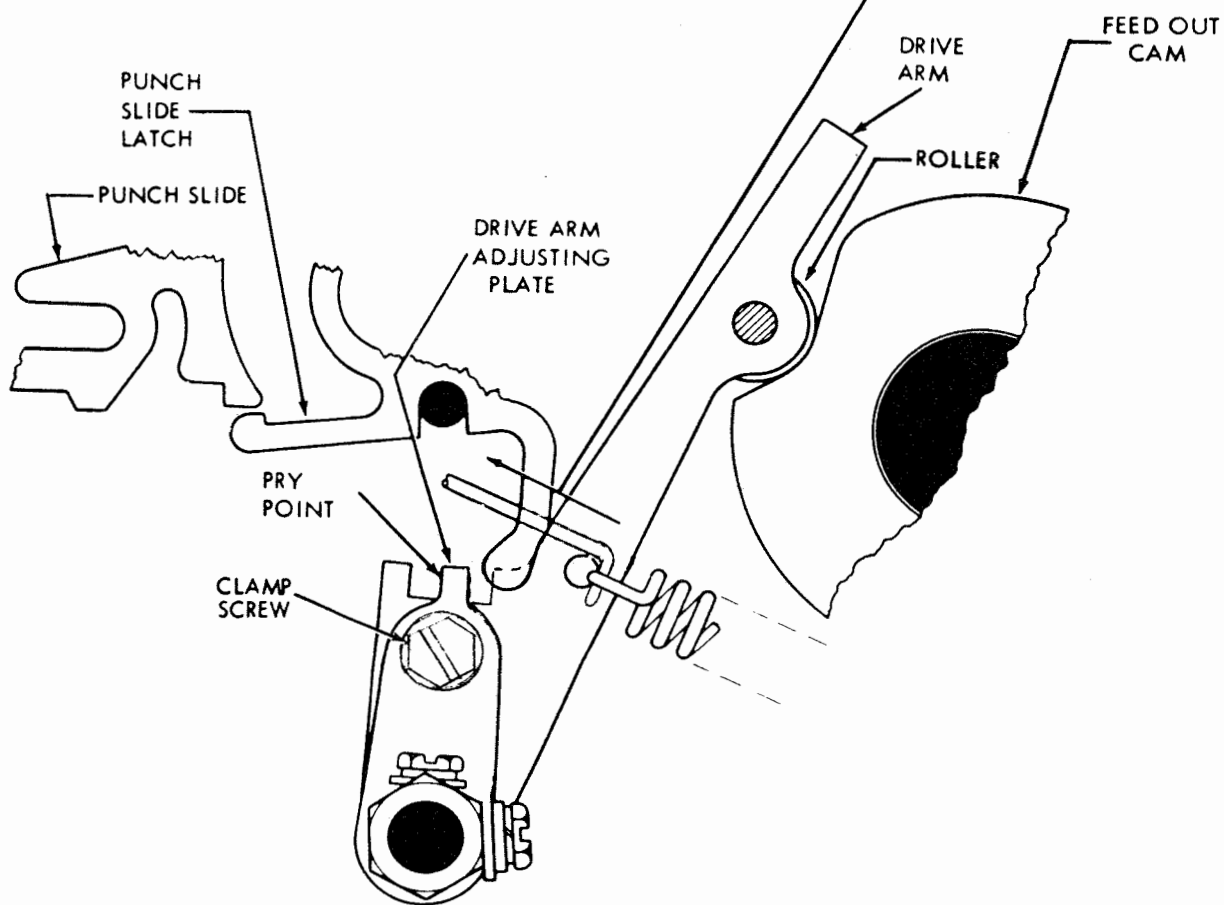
G. TYPING REPERFORATOR TT-375/UG, REMOTE CONTROL
